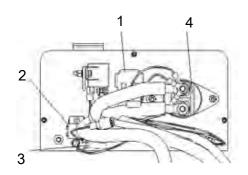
Fig. Engine house 1. Main fuse 2. Fuel solenoid relay 3. Starter relay 4. Master switch
